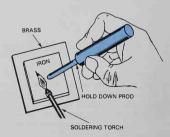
While sweat soldering, pressure is applied to the iron by the hold down prod while heat is applied.
